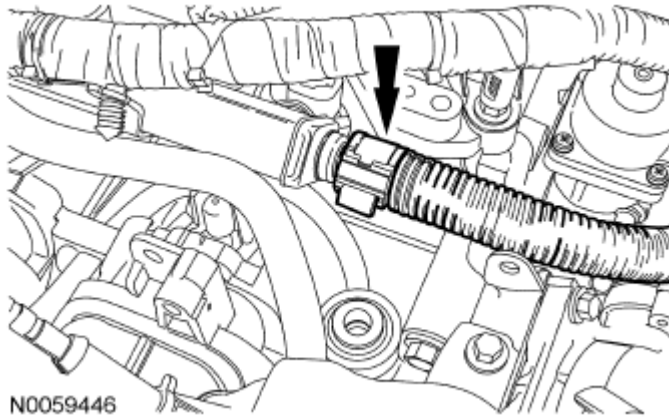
Locating Fuel Supply Tube Quick Connect Coupling
